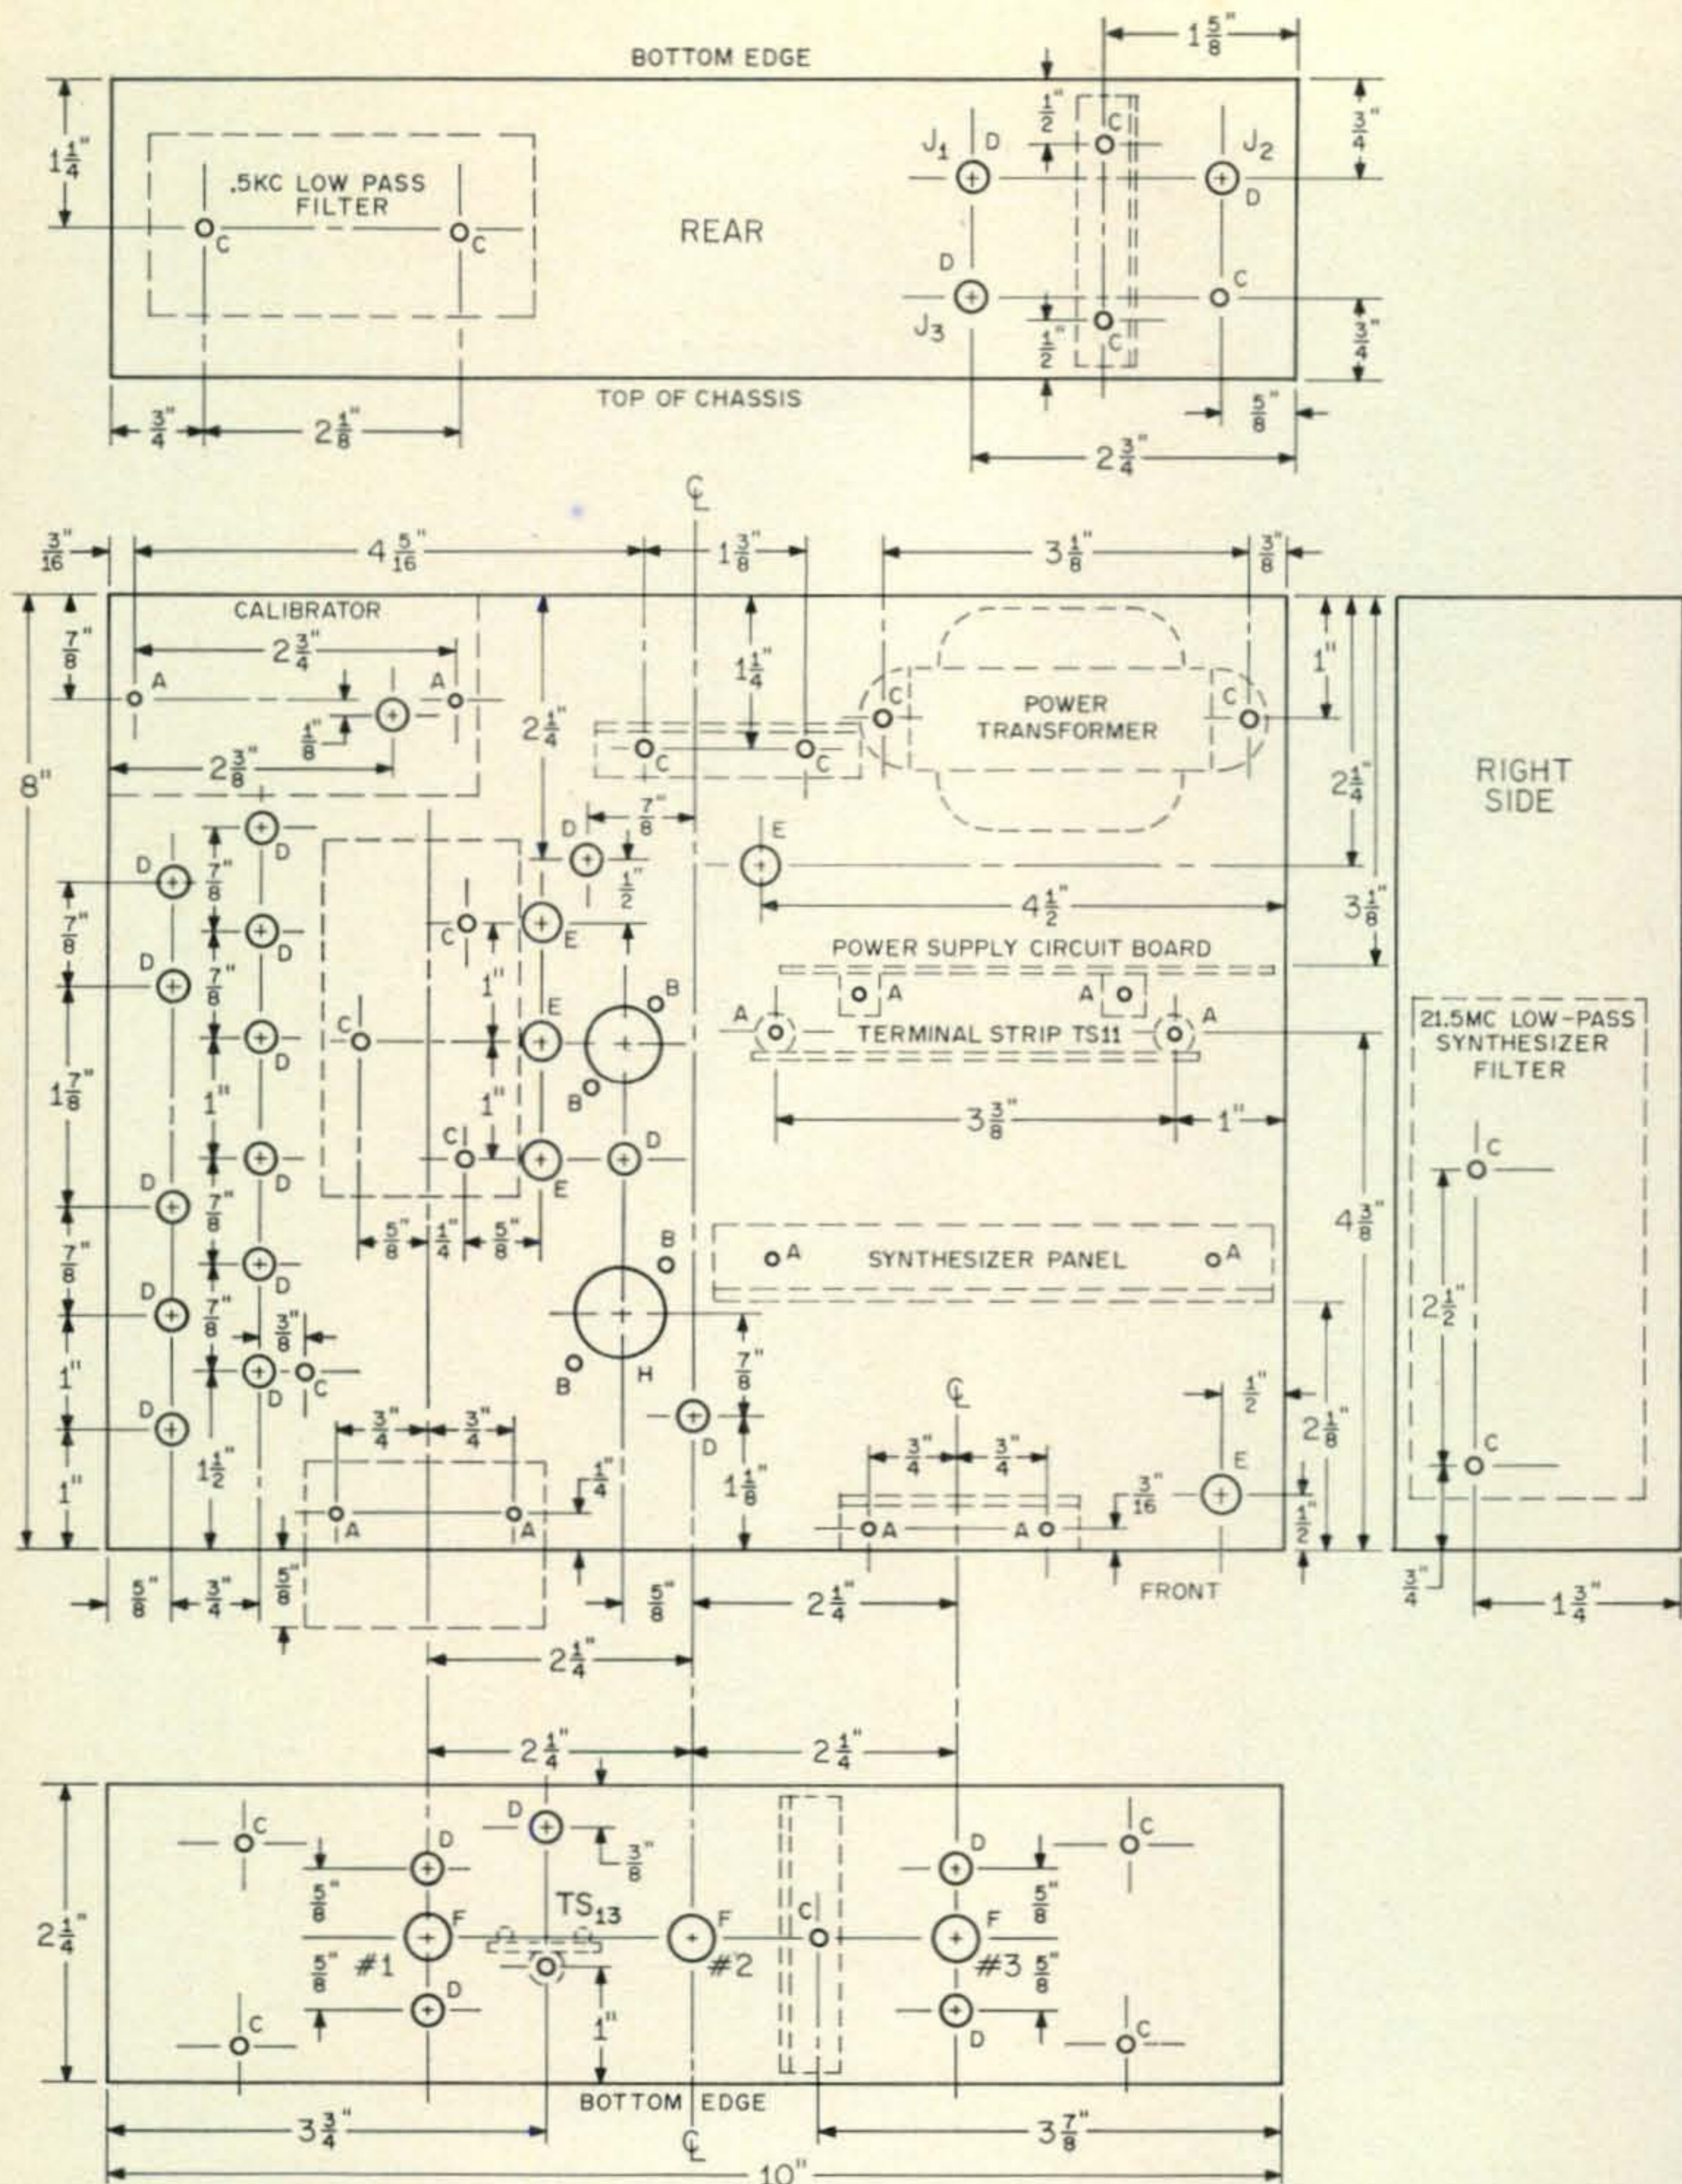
Chassis layout and dimensions. Where locating dimensions are not given, hole will be located later using component for a template. The D holes on the chassis rear are for phono Jacks ( $J_1$ —antenna input,  $J_2$ —i.f. output,  $J_3$ —a.g.c.). The fourth hole is for a 6-32 screw used as a ground terminal. Drill sizes for holes are: A—#36, B—#30, C—#26, D— $\frac{1}{4}$ ", E— $\frac{5}{16}$ ", F— $\frac{3}{8}$ ", G— $\frac{5}{8}$ " (punch), H— $\frac{3}{4}$ " (punch), I— $\frac{3}{16}$ ".
